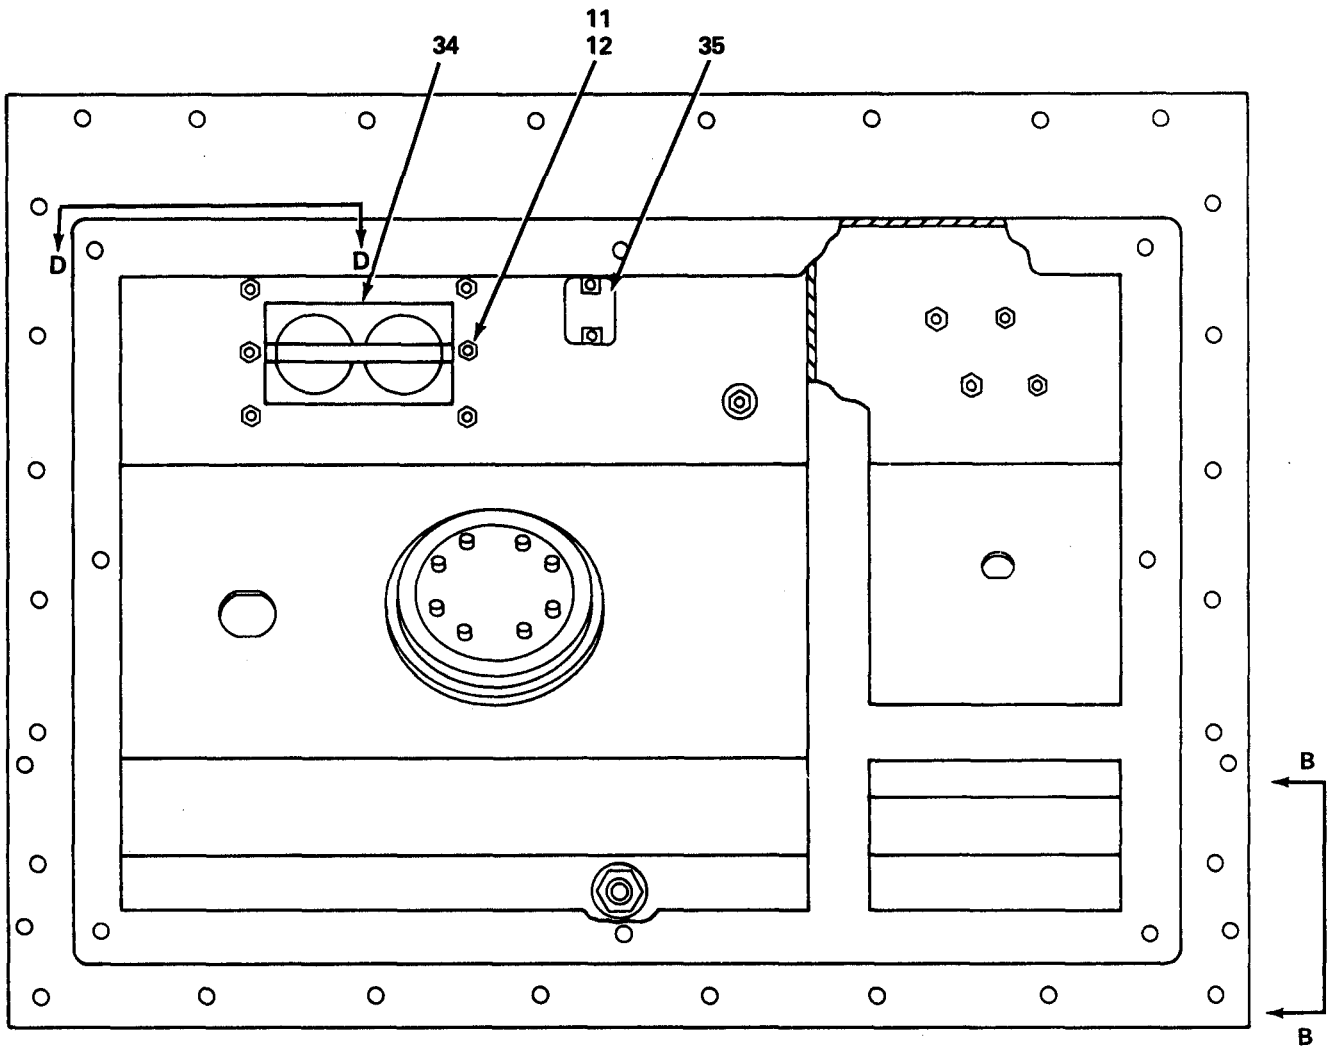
Power Entrance Box Assembly (Sheet 1 of 4)
